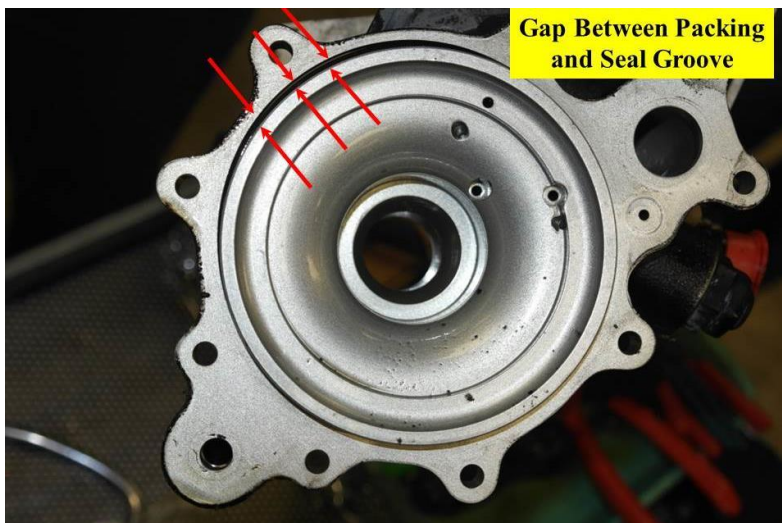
EVENT VALVE BLOCK PACKING LOOSE WITHIN RECESS GROOVE OF THE VALVE BLOCK
